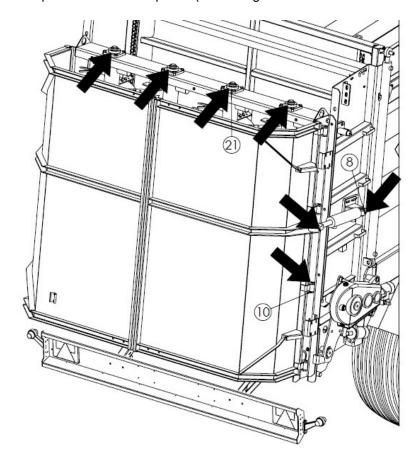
The spreader lubrication points (The 4-auger vertical beater unit)
